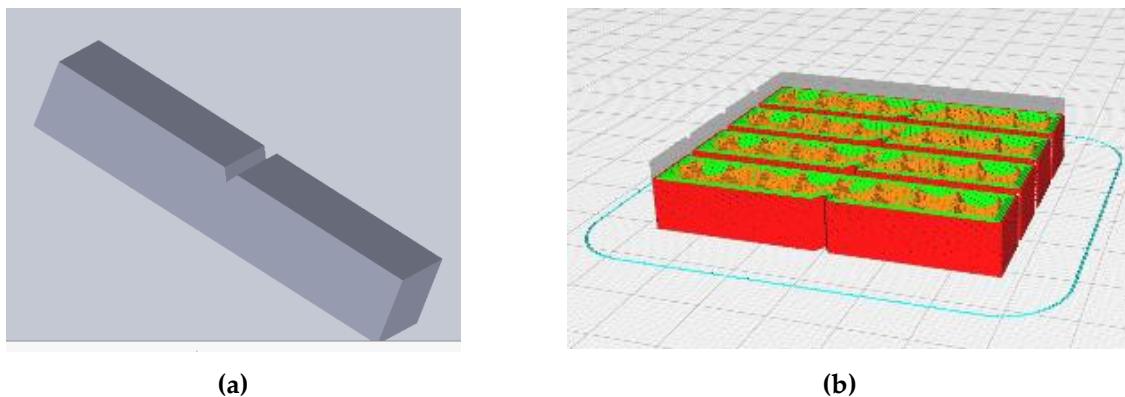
The process of making specimens with CAD - CAM (a) CAD process with SolidWorks; (b) CAM process with Ultimaker Cura
